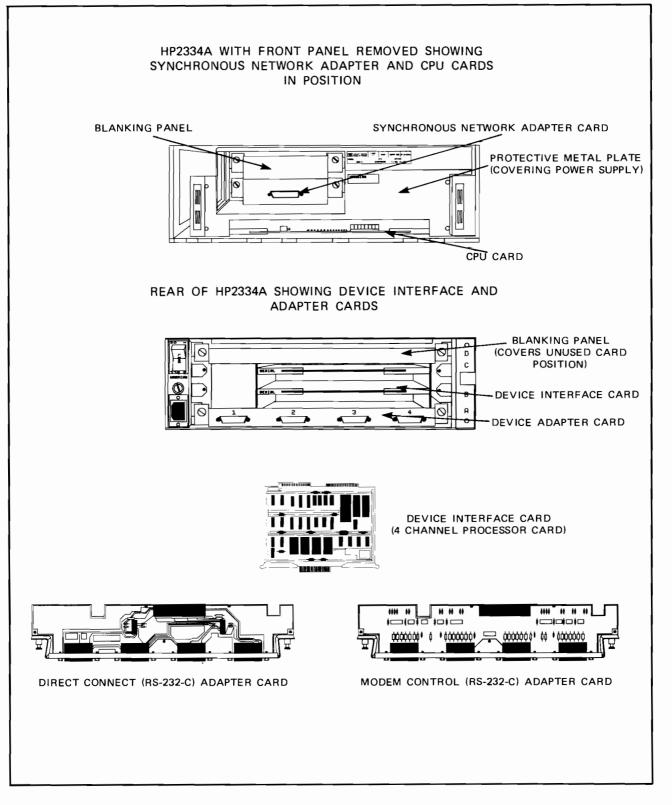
HP2334A Interface/Adapter Card Assembly
